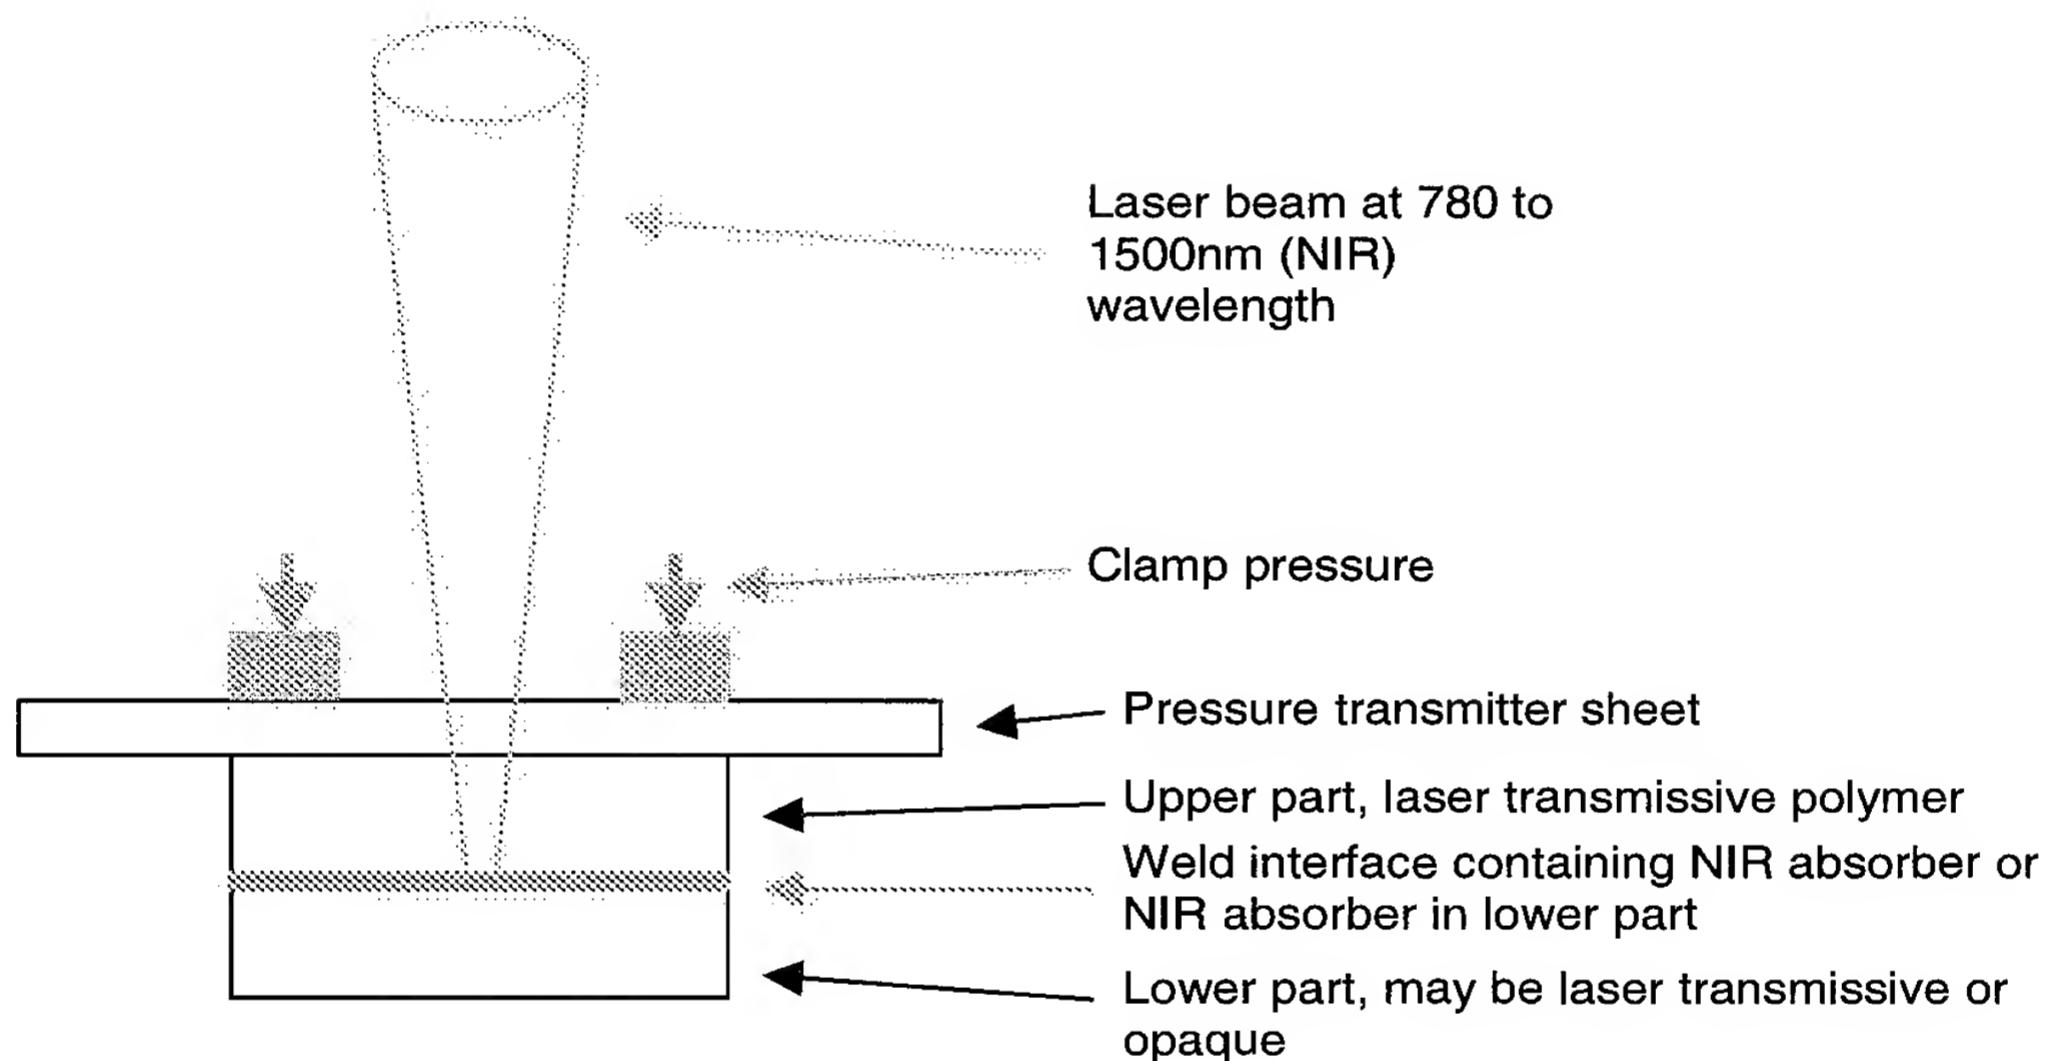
Schematic drawing of the transmission laser welding process where the location of the weld interface is shown.
